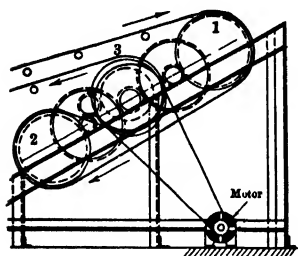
Three-pulley Drive with Compensating Gearing.
